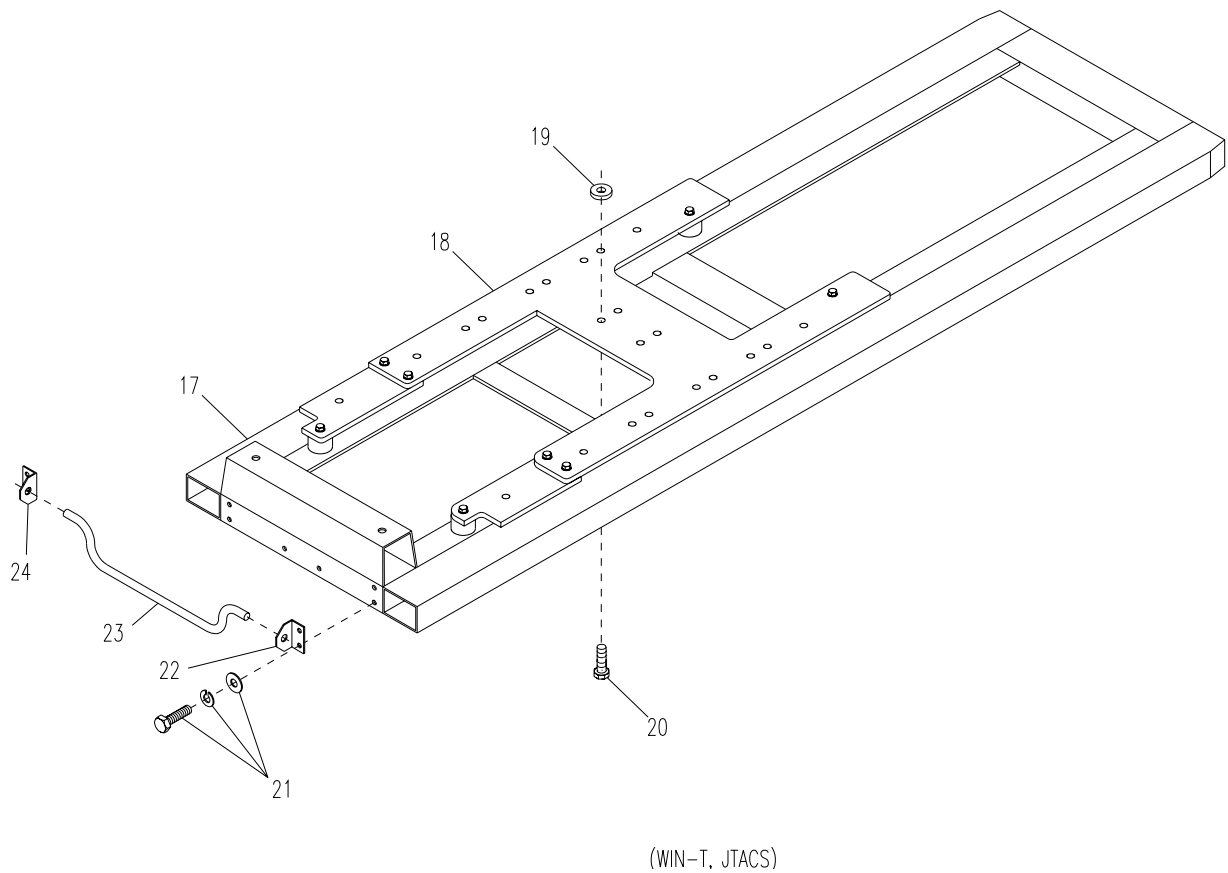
Frame Assembly and Vibration Isolator Mount Assembly (Sheet 4 of 6)
